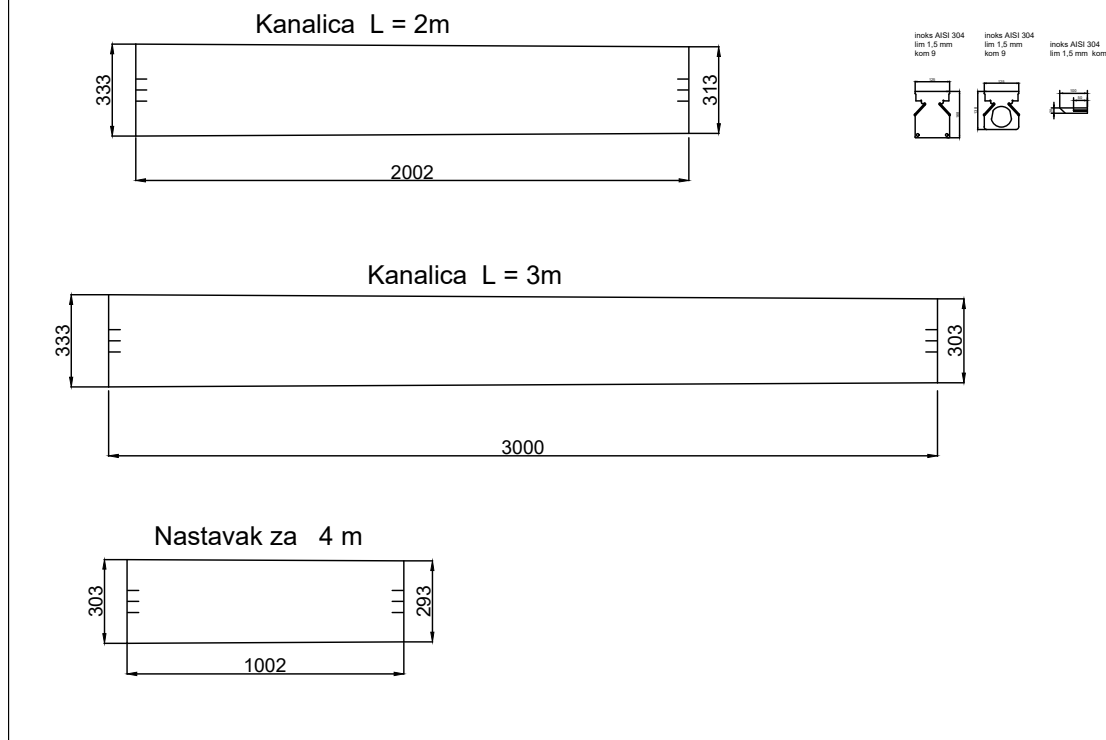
Laser drawing for the new design of KORA (Source: Own drawing)
